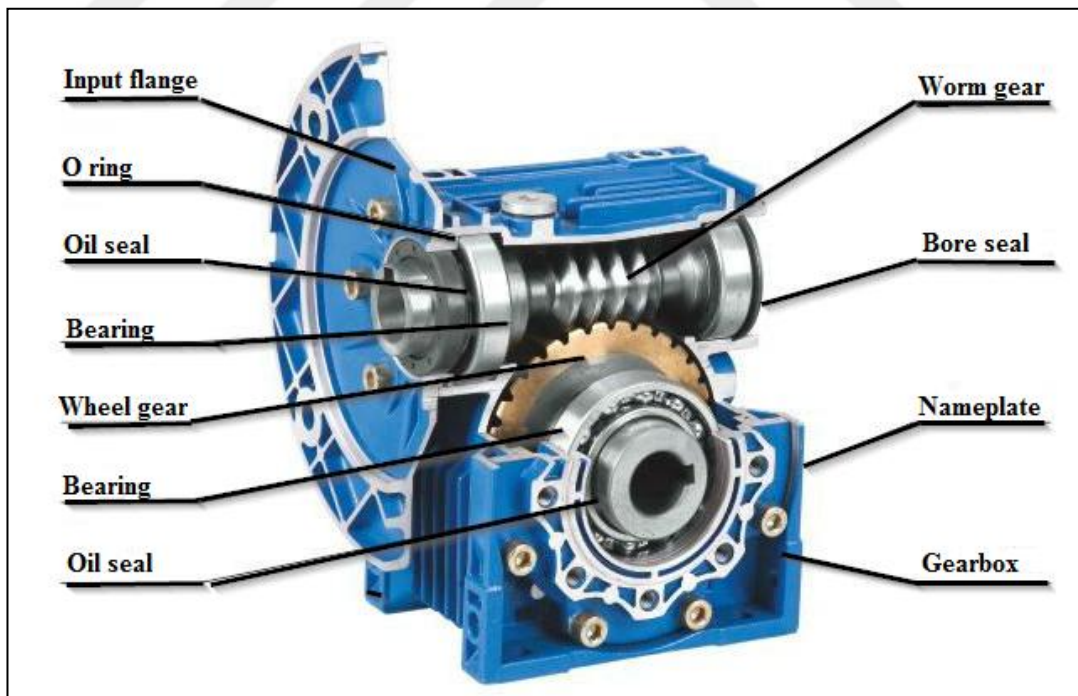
Modern worm gearbox and their parts (Zhejiang Evergear Drive Machine, n.d.)
